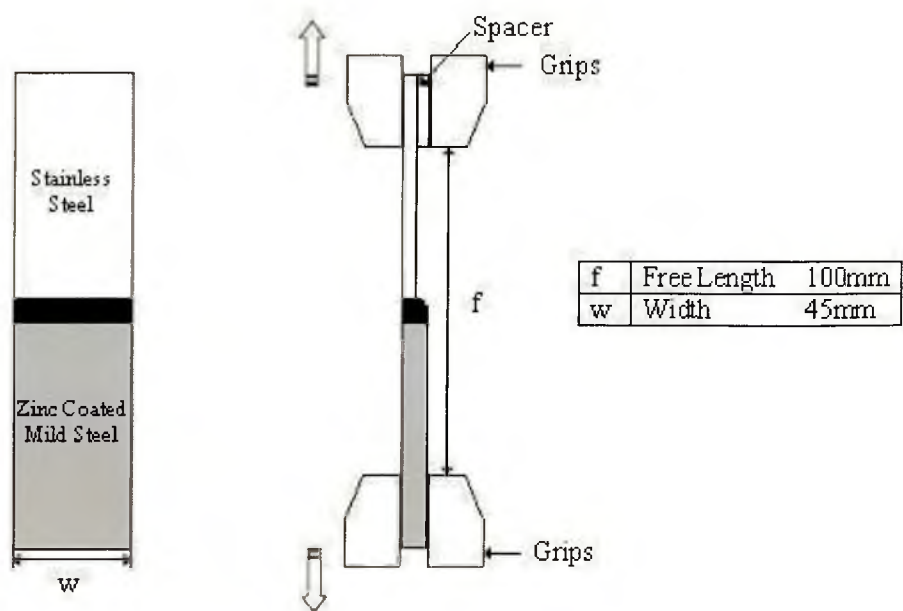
Schematic diagram showing dimensions and setup for dissimilar thickness fatigue tests
